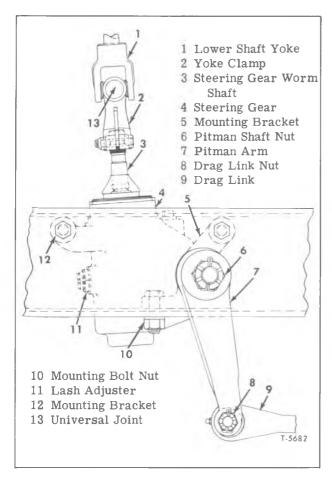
Steering Gear and Connections (Tilt Cab Model)
